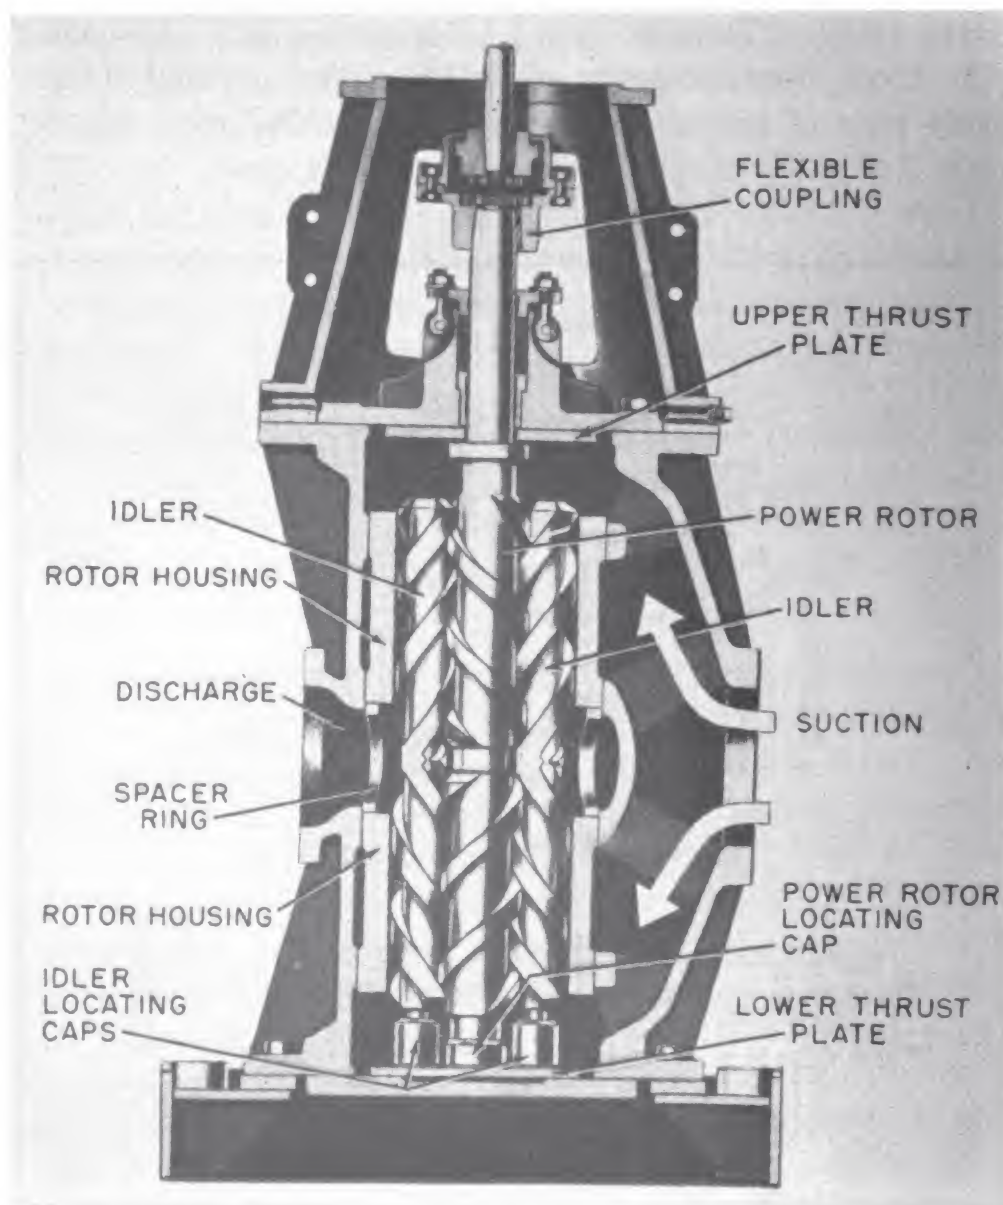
Cutaway view of triple-screw high-pitch pump.
